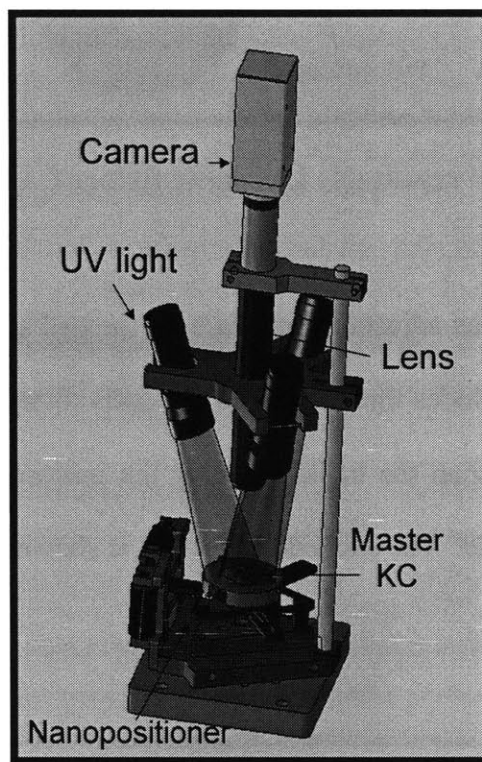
Assembly station CAD model, including vision system, nanopositioner, UV lights, and master KC fixture
